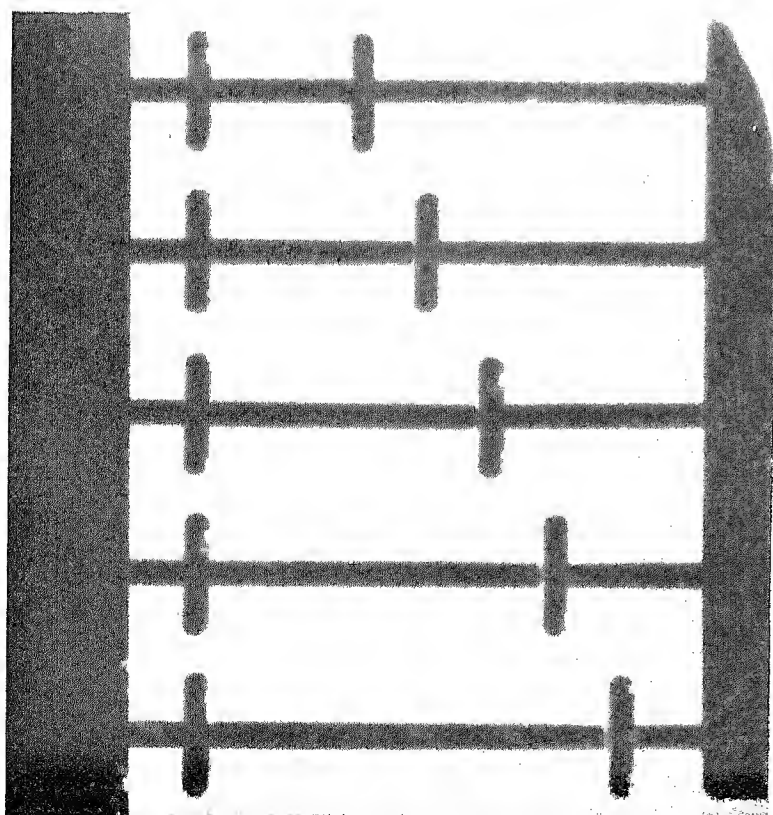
Radiograph by radium of battery grid (lead alloy), showing holes and cracks.
